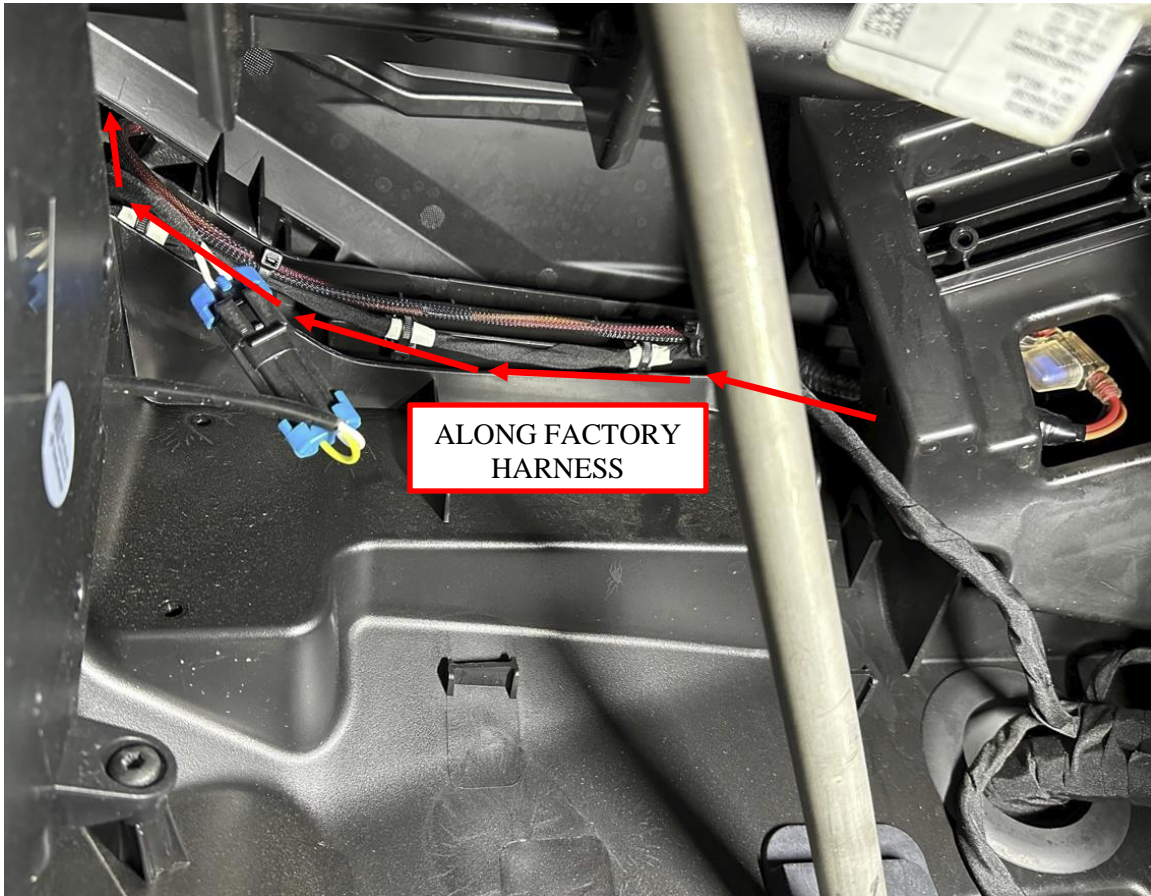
Chassis harness routing (view from driver's foot well under steering wheel).
